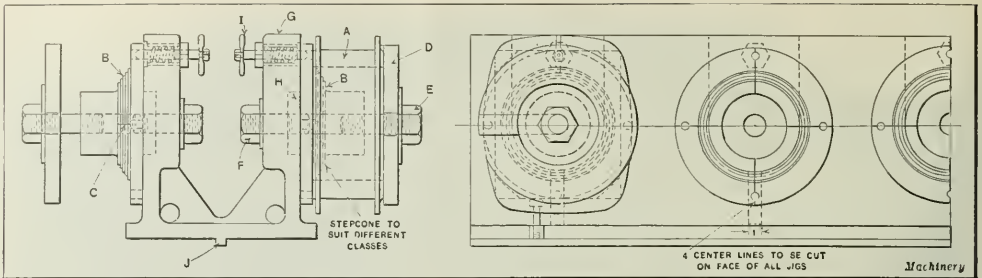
A Multiple Planing Fixture for Use in machining Main- and Side-rod Brasses
